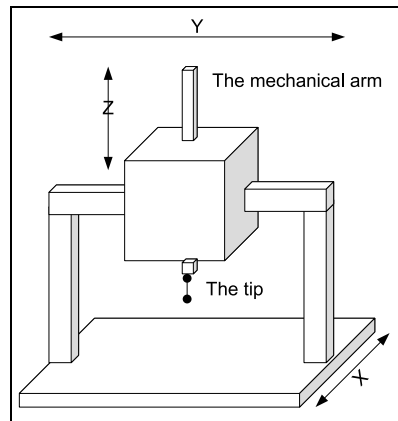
A schematic drawing of a coordinate measuring machine.
